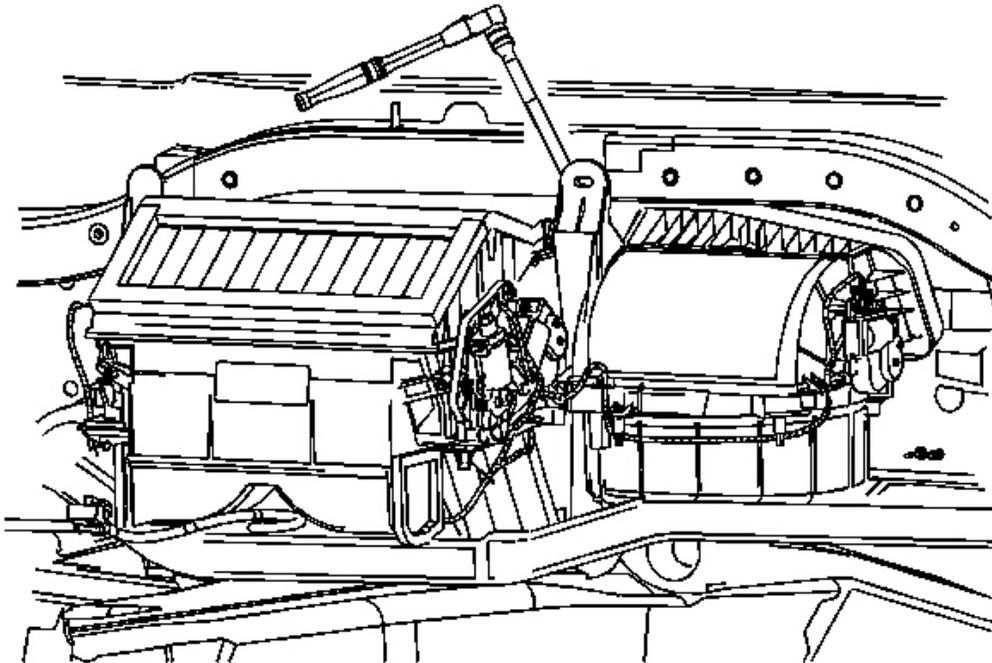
Identifying Front LH Recirculation Housing Retaining Screw
